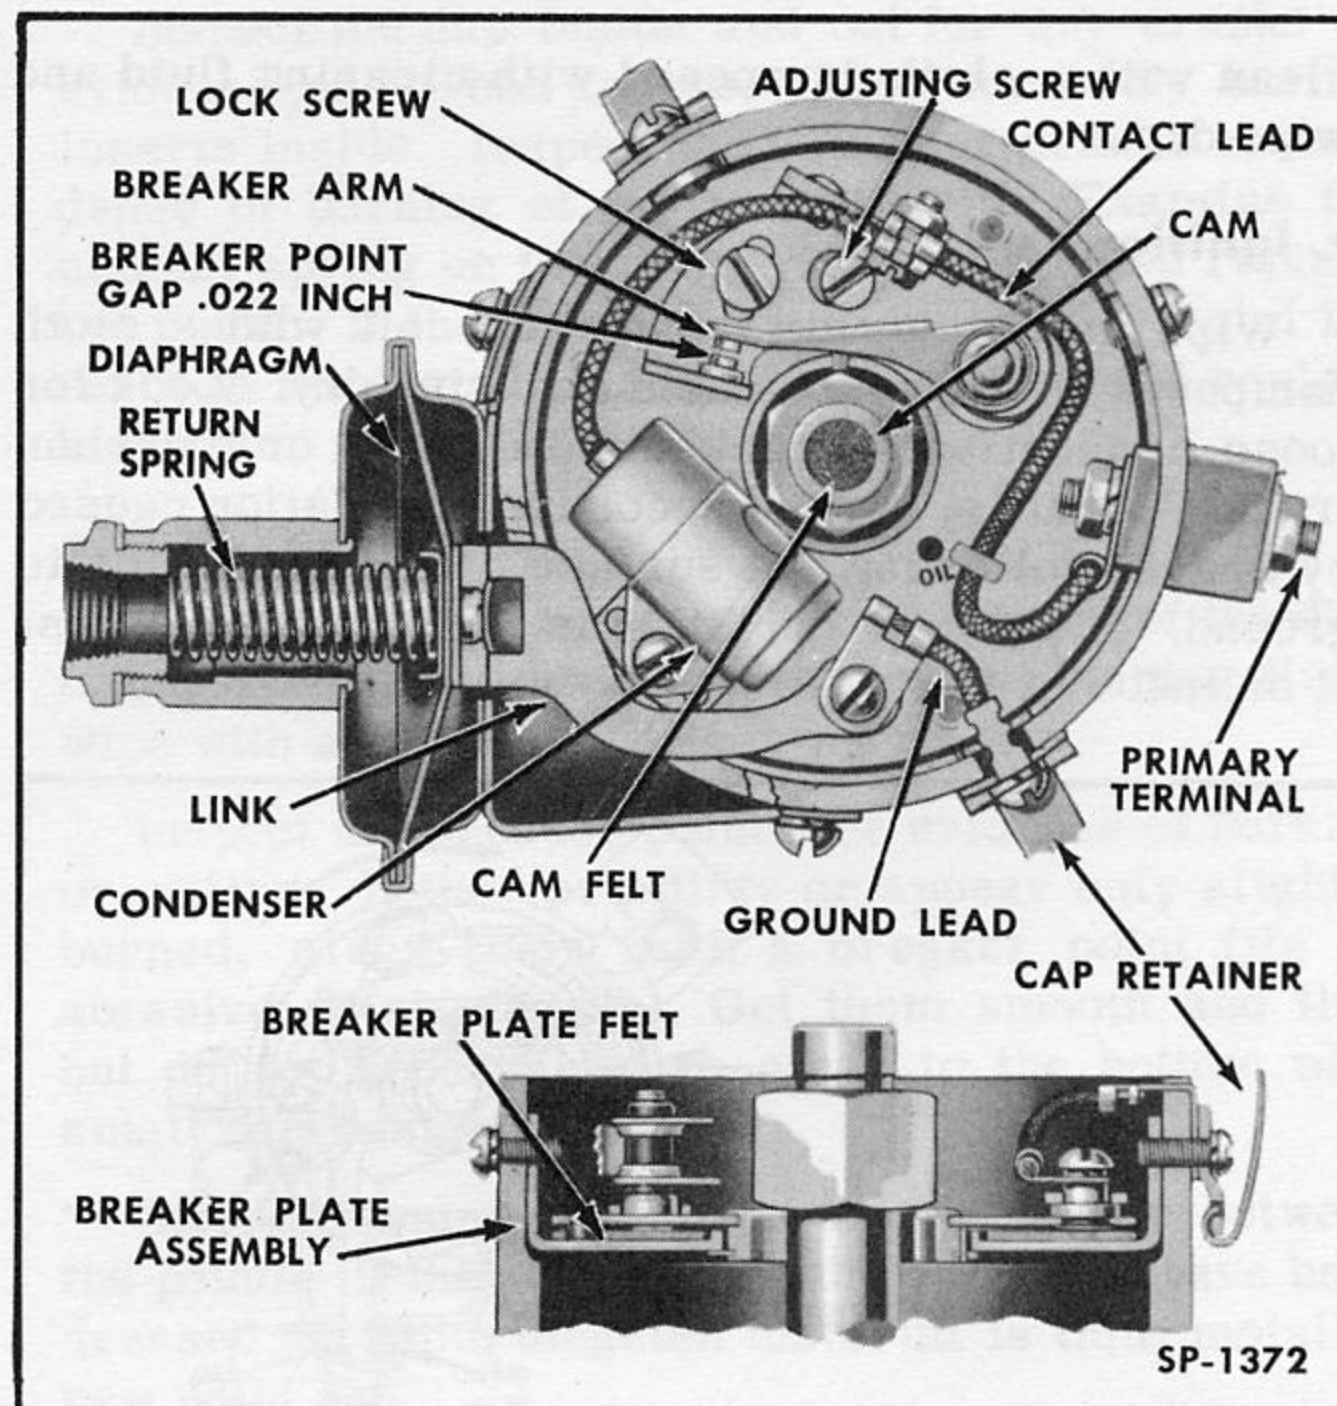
Delco-Remy Distributor—Cap and Rotor Removed (6 Cylinder Shown)
